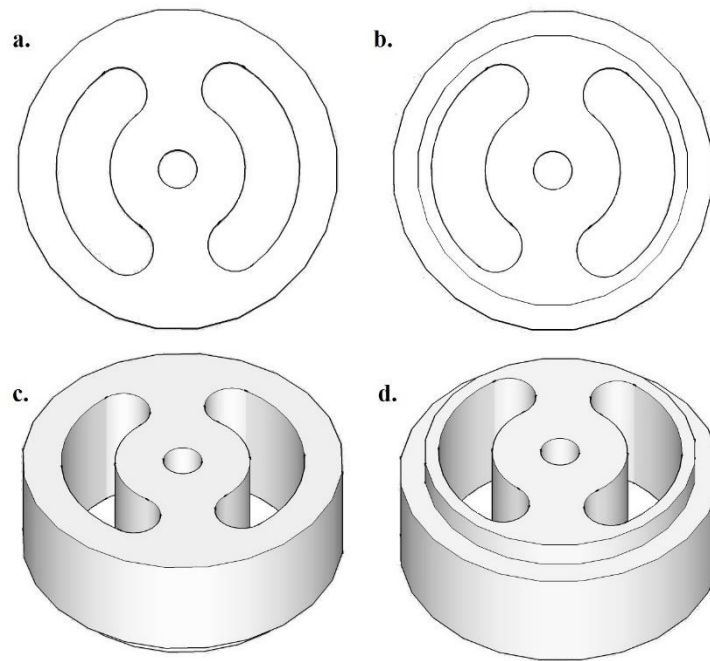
Schematic illustrations of top and bottom views of upper part of prototype 10, (a. top view, b. bottom view, c. top inclined view, d. bottom inclined view)
